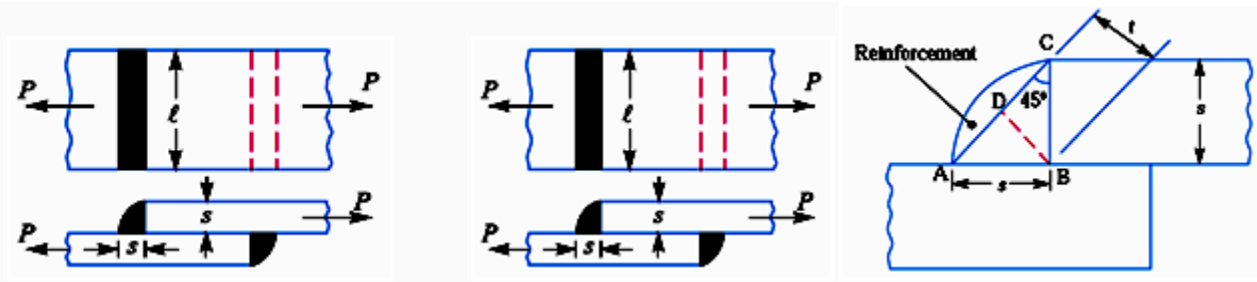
Single & Double Transverse Fillet Weld
